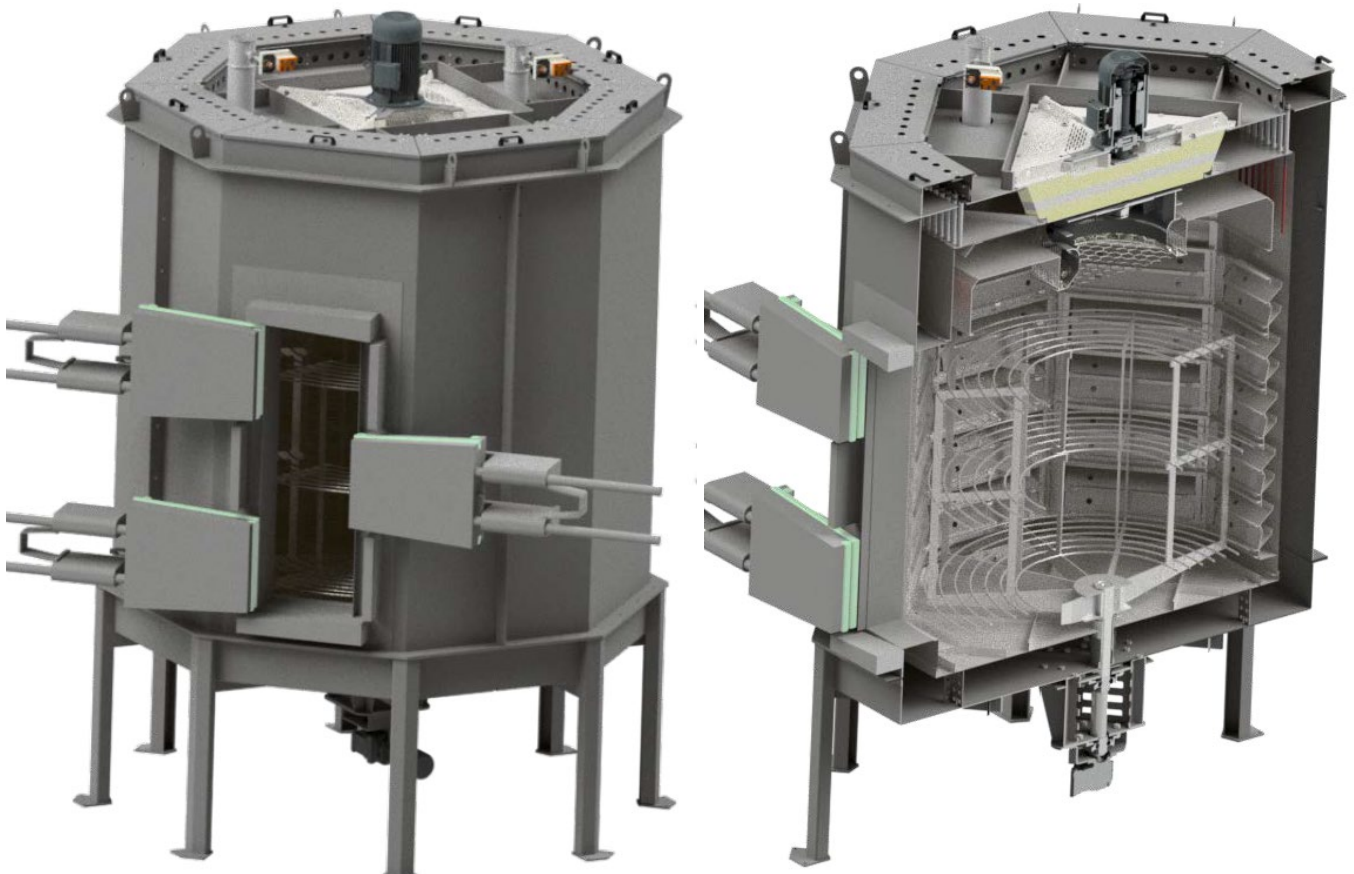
Design of the solutionizing furnace employing a rotatable mounting system.
